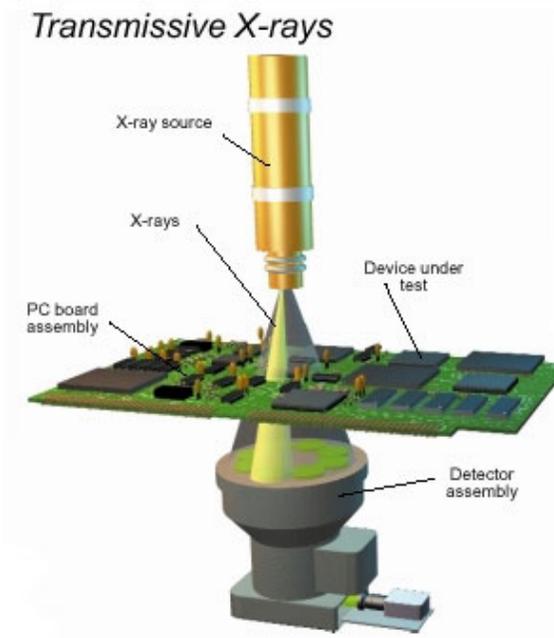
X-ray radiography (Source: Machinedesign®)
